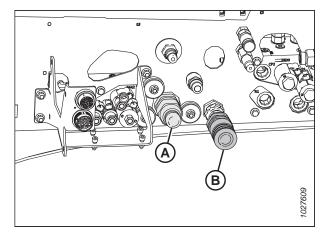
Quick Couplers on Rotary Disc Ready Windrower
